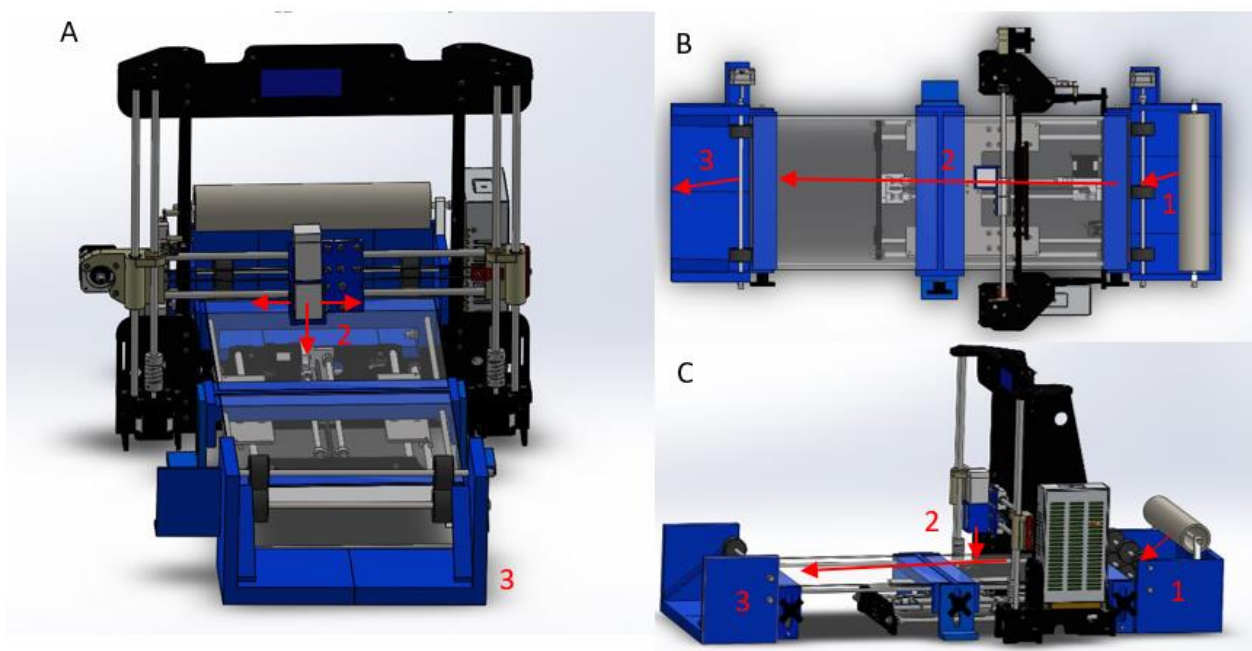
the schematic of stamping machine. A) Front, B) Top and C) Side view
